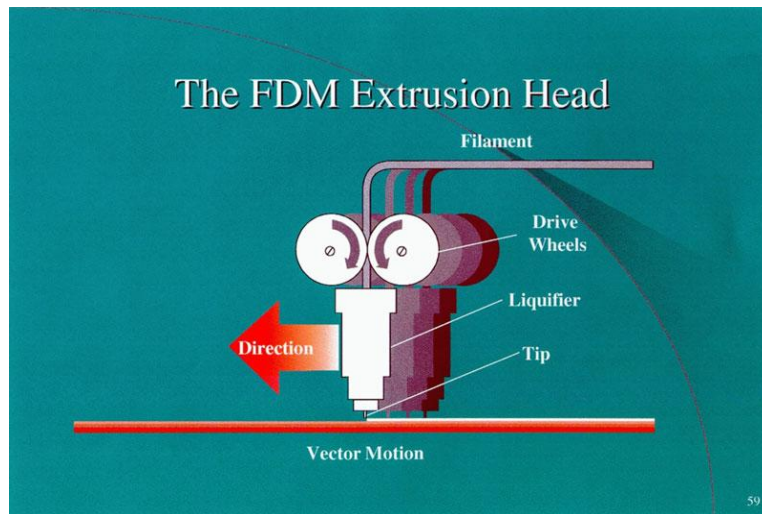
Fused deposition modeling feeds a filament into a shaft which is then extruded and deposited onto a platform.
